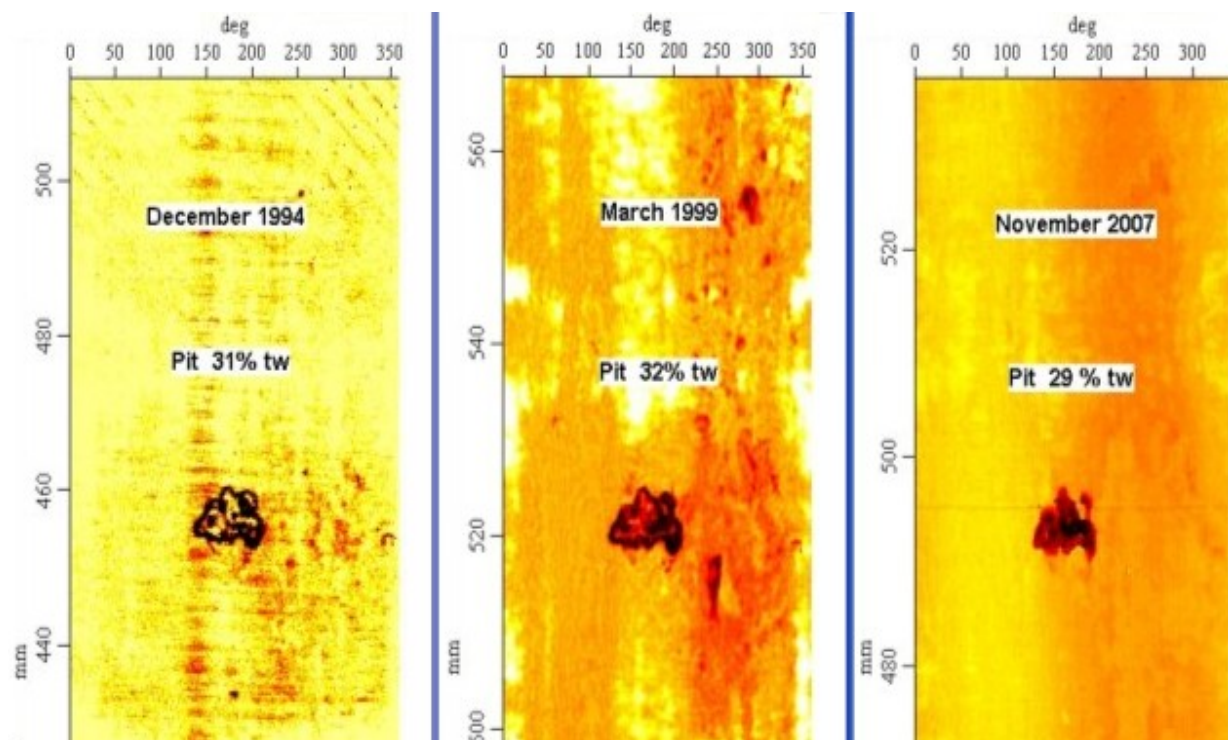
In-service monitoring of corrosion pitting (Sizing error tolerance is +/-5% tw)
